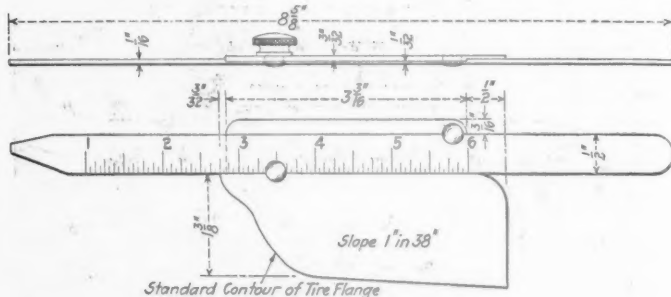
Gage for Measuring Distance Between Tire Flange and Locomotive Frame
